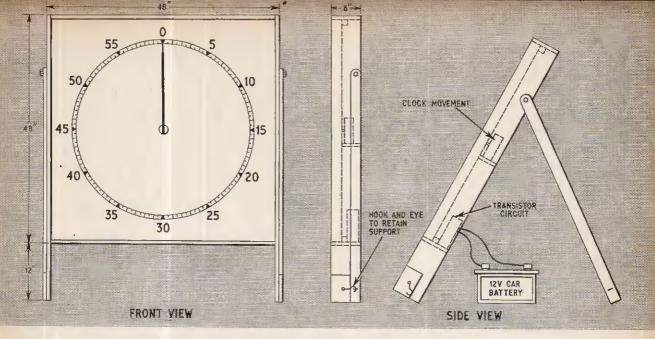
Front and side view of the complete clock showing the overall dimensions
